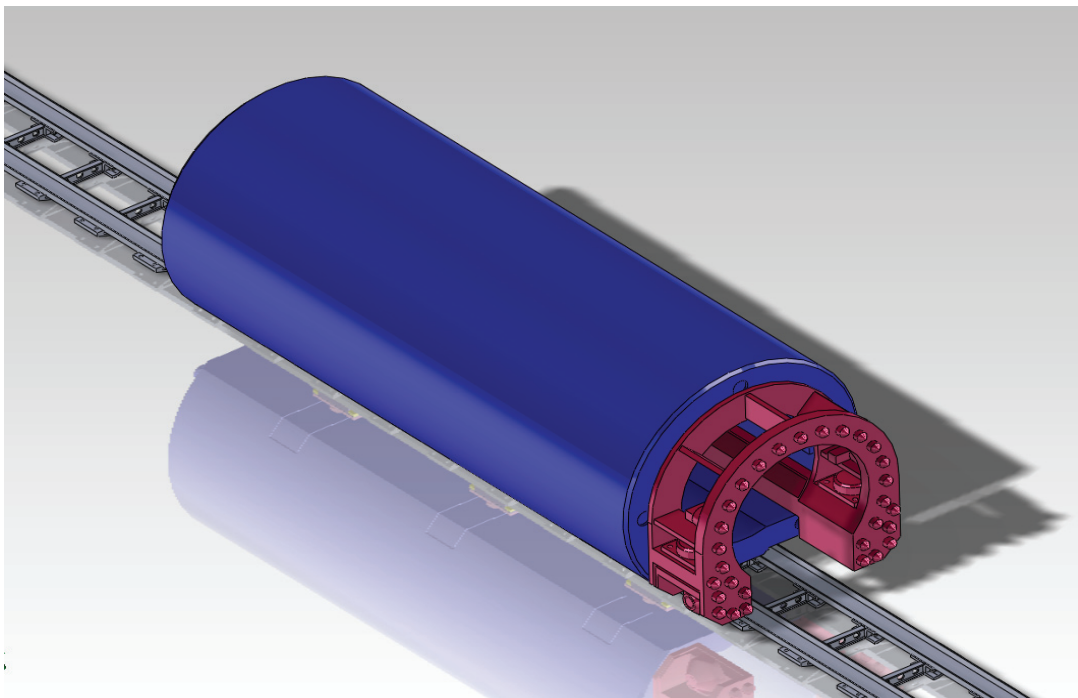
Container Retrieval Machine image showing the face of the Advance Frame.
